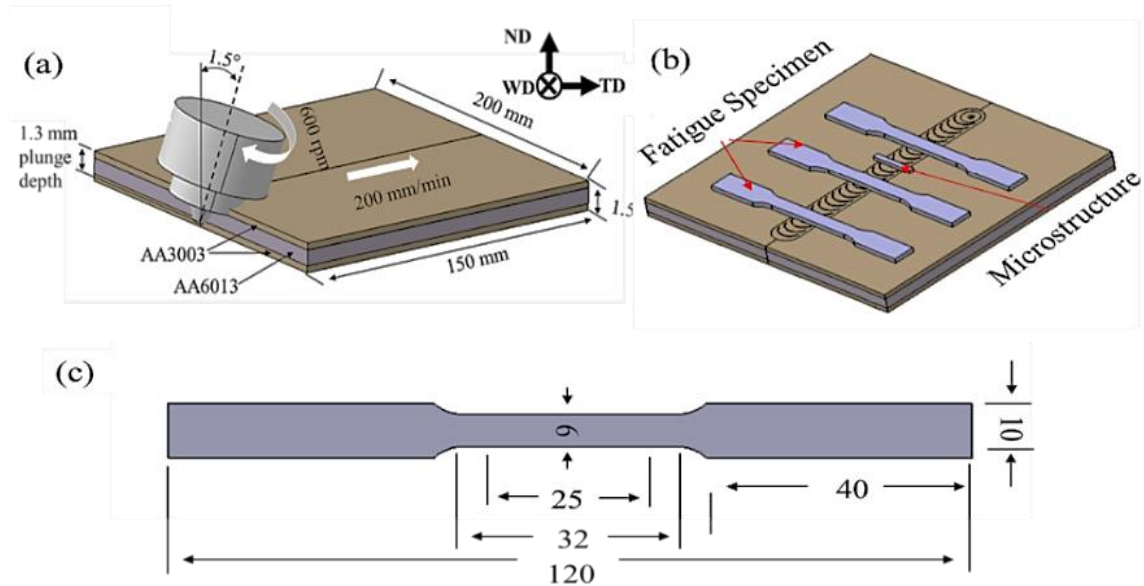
(a) Schematics of FSW, (b) extraction of tensile sample, (c) dimensions of tensile specimens
